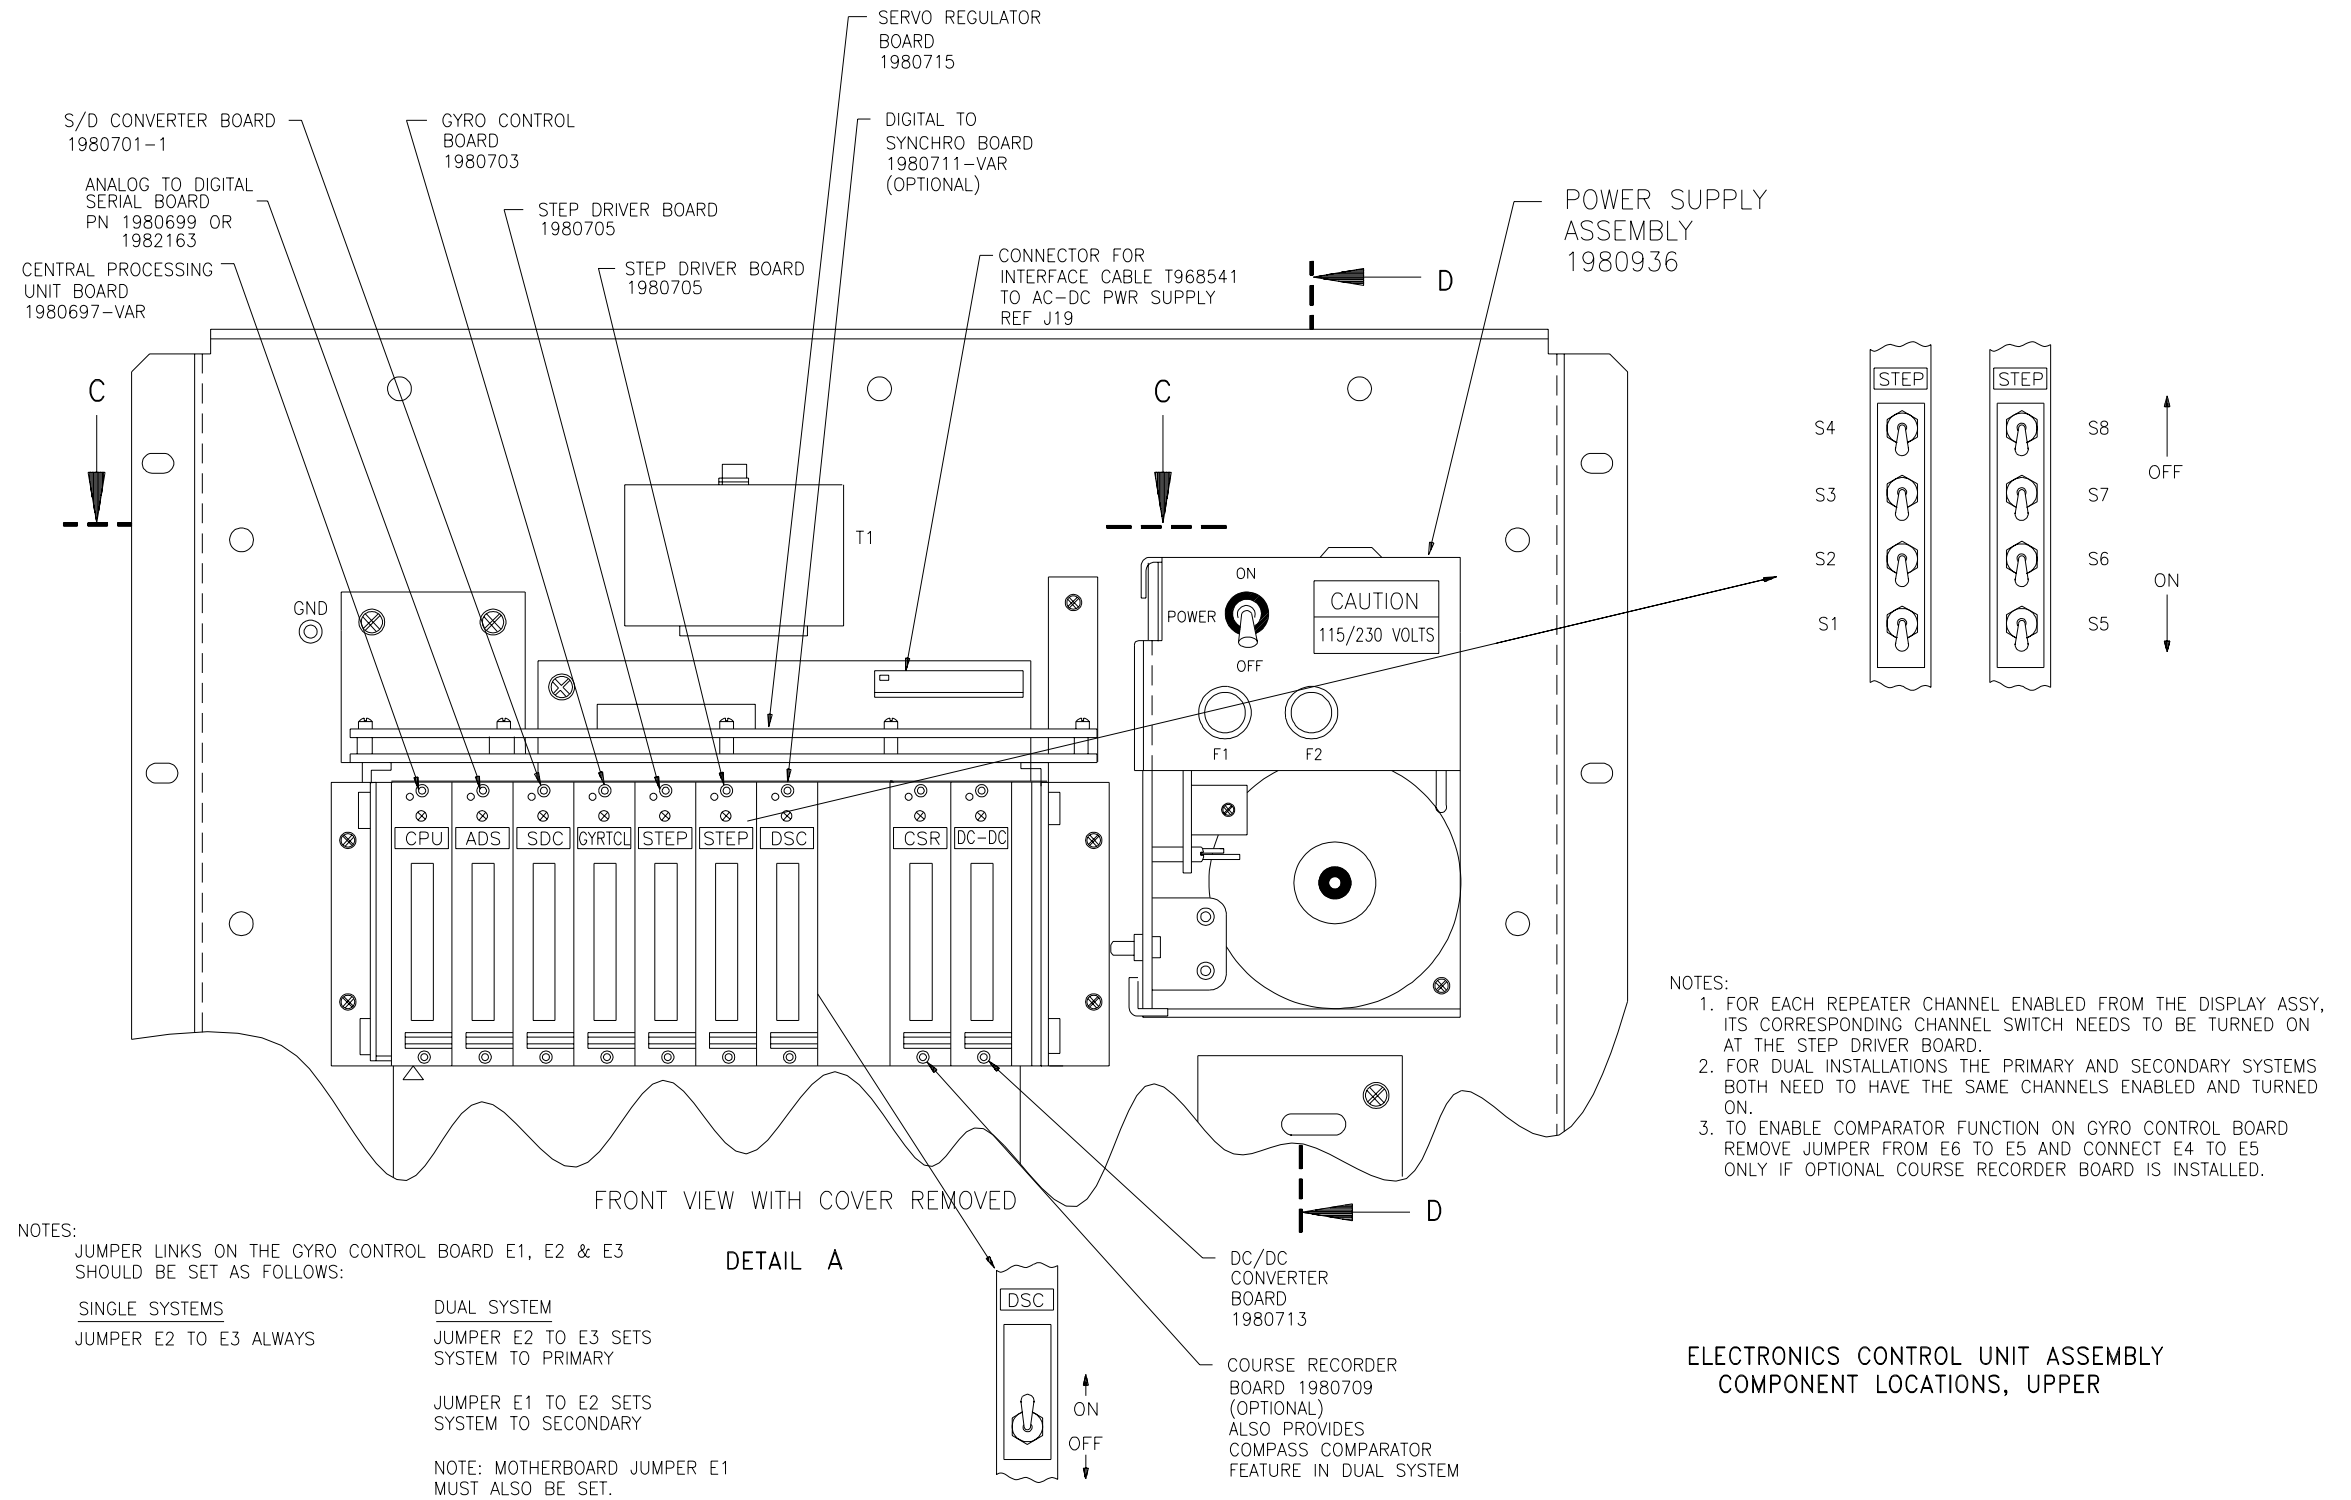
MK 37 VT System Electrical Installation Drawing (Sheet 10 of 15)
